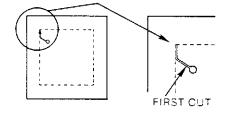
Each piece to be cut out must have its own blade insertion hole. Often, as shown here, the holes can be part of the design.
